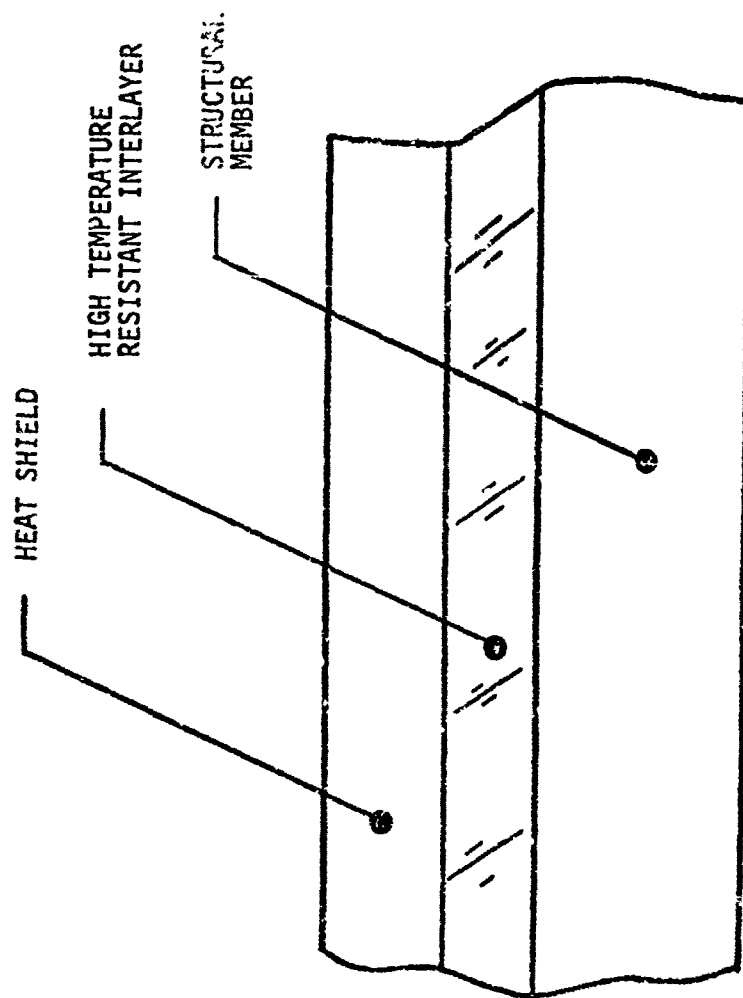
TYPICAL CONSTRUCTION OF AN
